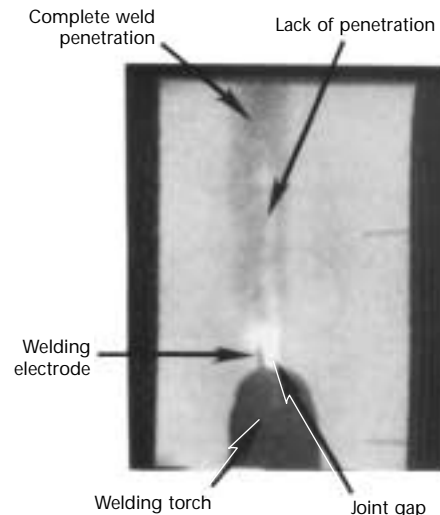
Example showing one frame of radiosopic image of submerged arc welding. Lack of weld penetration is due to incorrect position of welding electrode relative to joint gap.
